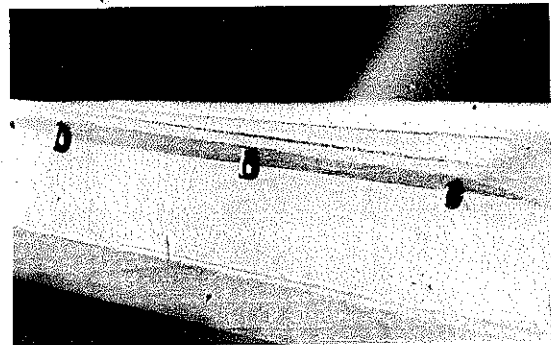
Here is the cheekpiece showing the eyelets that will hold the vent pick.
